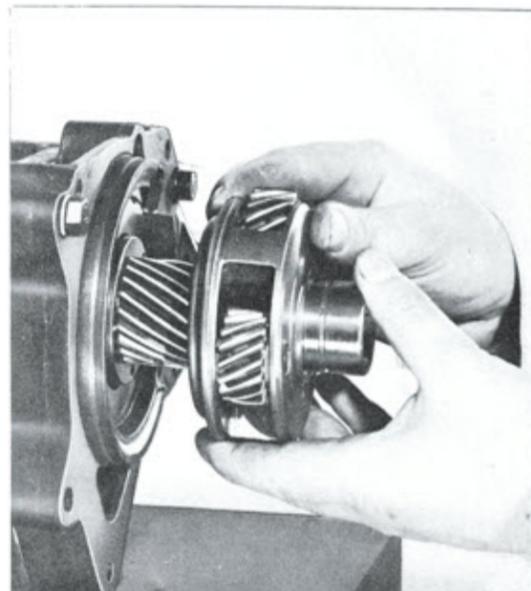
Removing Pinion and Cage Assembly. Puller May Be Used if Necessary
